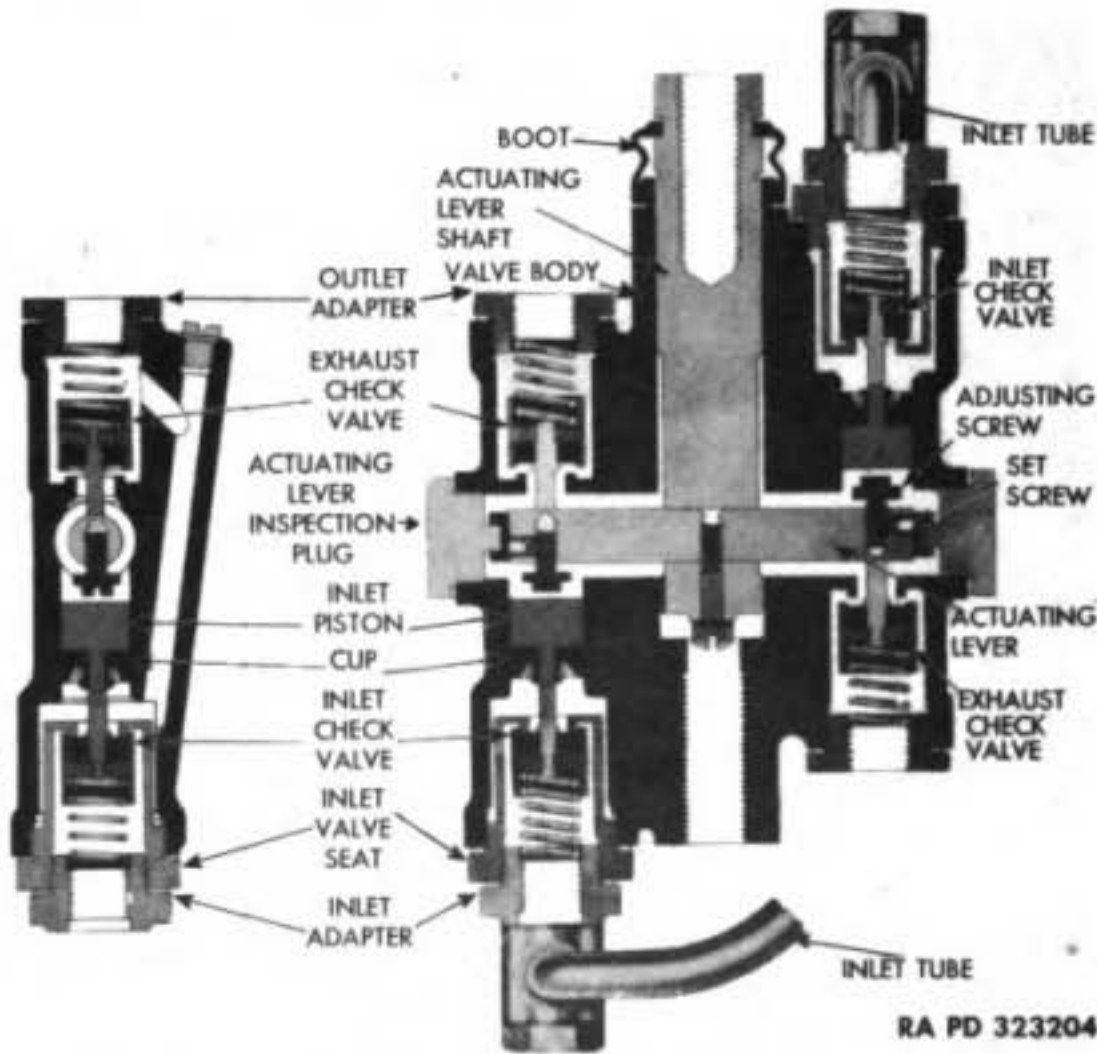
Clutch Shifting Valve with Connecting Air Hoses
